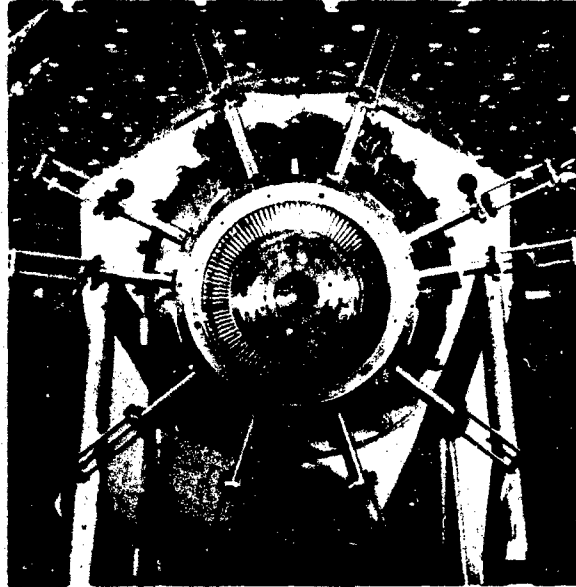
Build I, Full Front View of First Rotor Assembly (XPN-18905)
